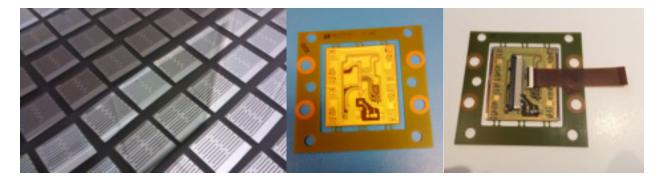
FRONT END CHIPS, FLEX CABLE, AND ASSEMBLED MODULE.
